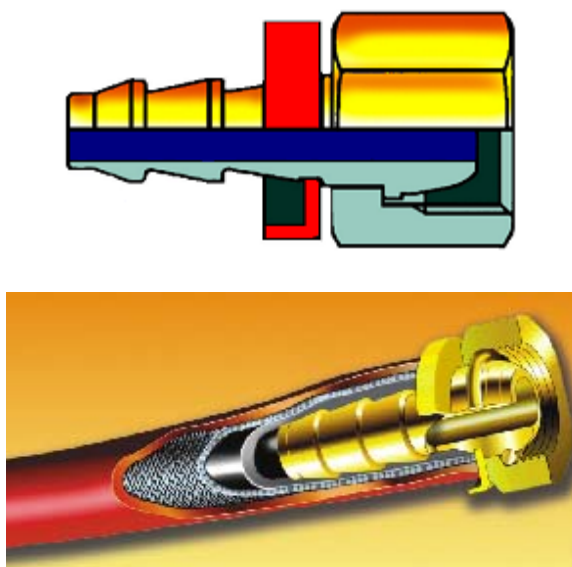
Example of a push on fitting and assembly with a *Parker Hannifin* 'Push Lok' hose
